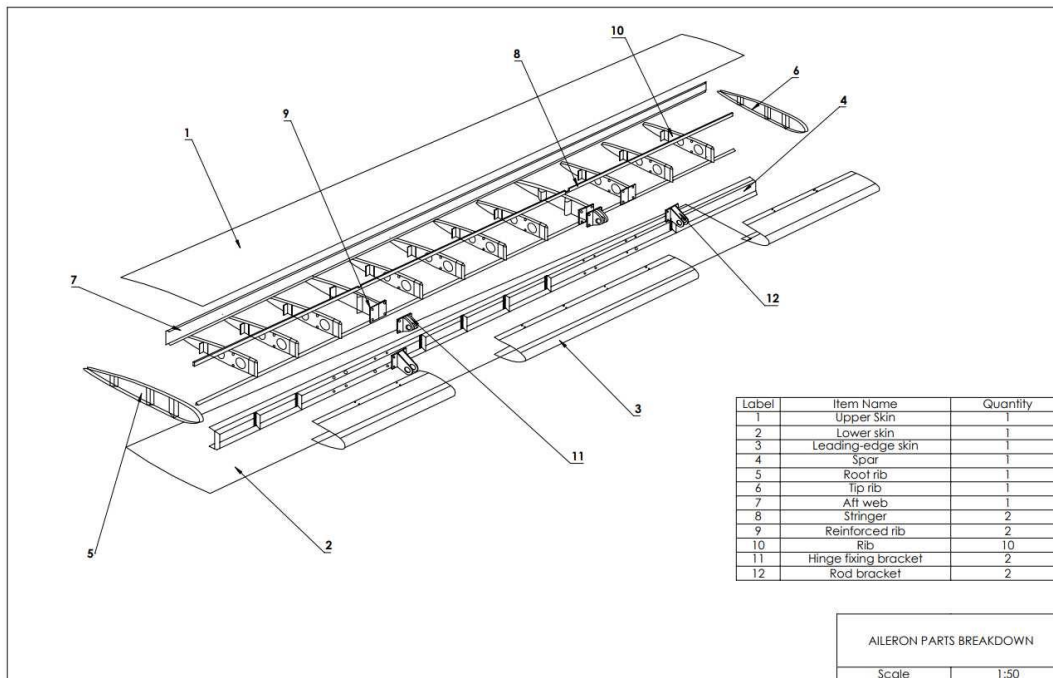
AILERON ASSEMBLE PARTS BREAKDOWN
